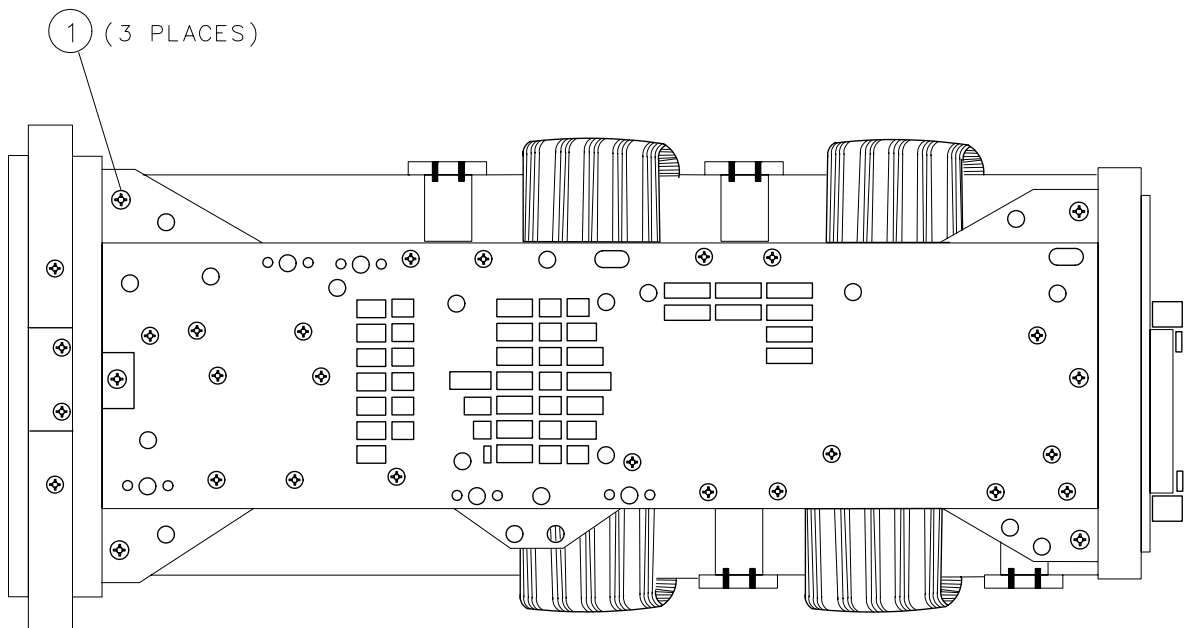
A18 and Line Switch Assembly Mounting Screws
